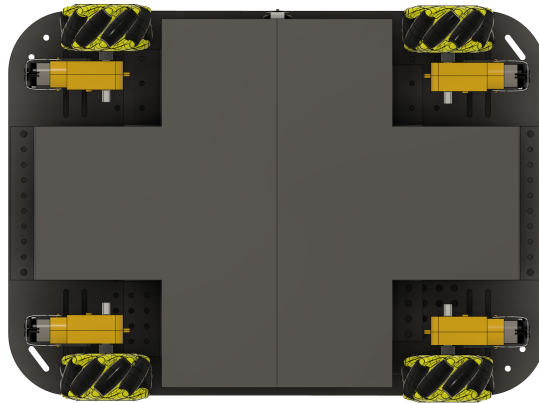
Bottom CAD view of the propulsion layout with four TT gear motors and corner wheel contact points.
